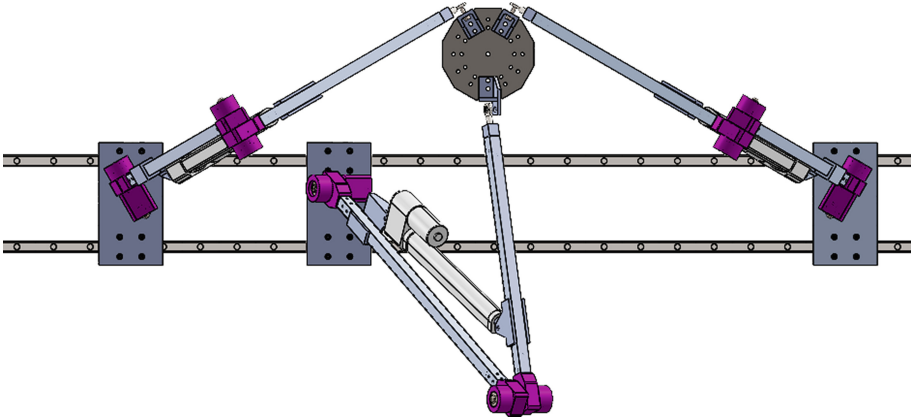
Top 3D view of the novel 6 DOF Parallel Kinematic Machine
